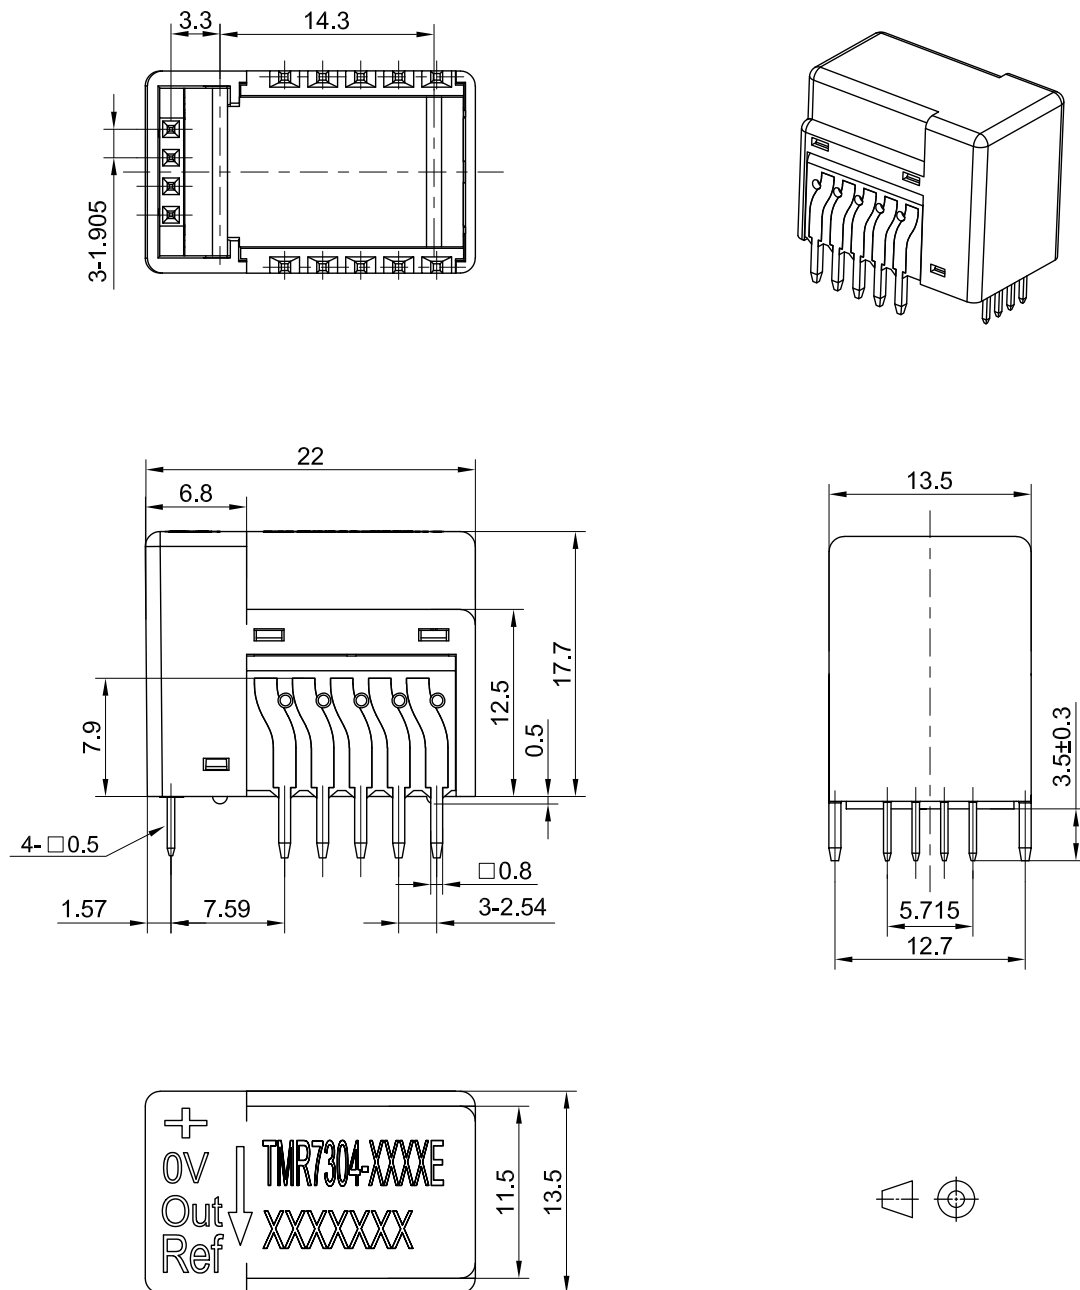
Dimension for TMR7304-E (unit: mm, tolerances for unmarked scales ±1 mm)
